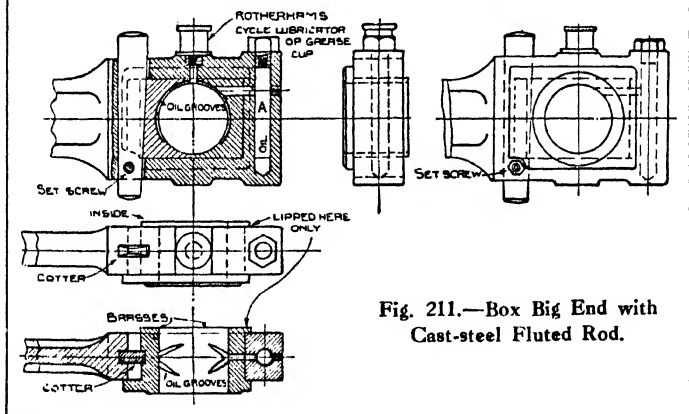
Box Big End with Cast-steel Fluted Rod.
